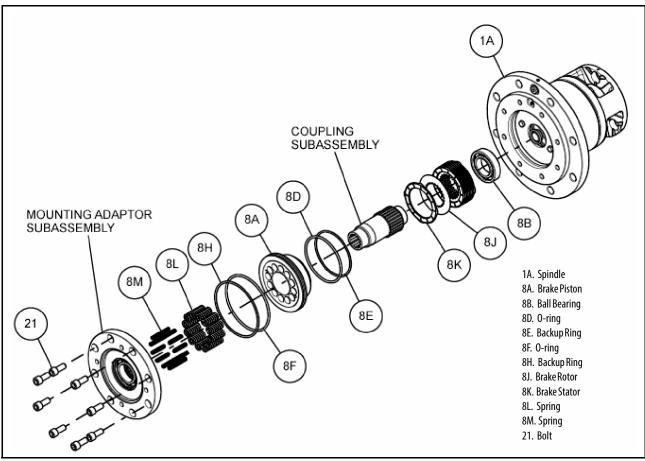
Spindle-Brake Subassembly - Figure 1
